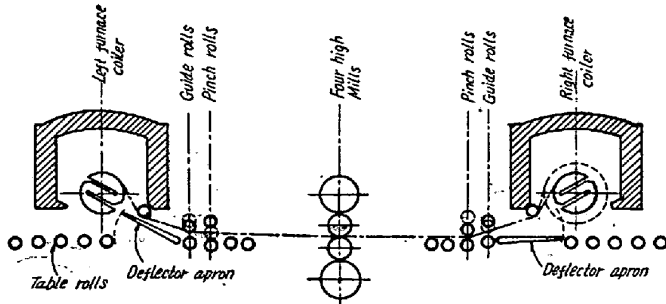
Schematic view of four-high reversing hot strip mill (A. F. Kenyon)
